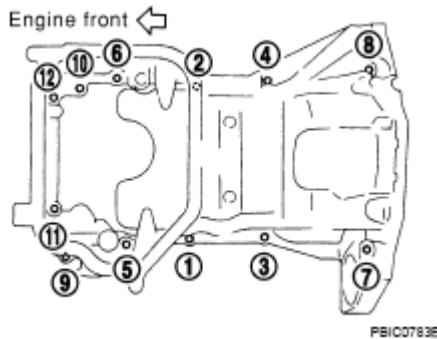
Identifying Rear Cover Plate Bolts Loosening Sequence
